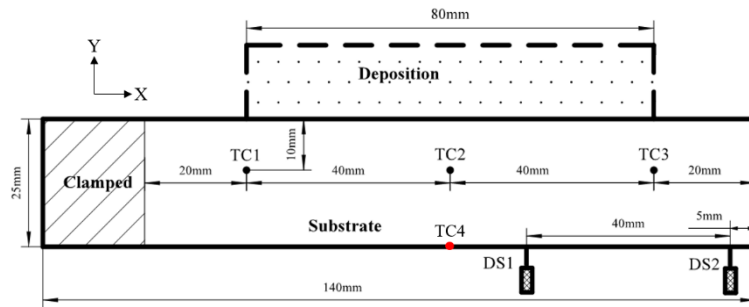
Sample dimensions and location of the thermocouples and deformation sensors.
